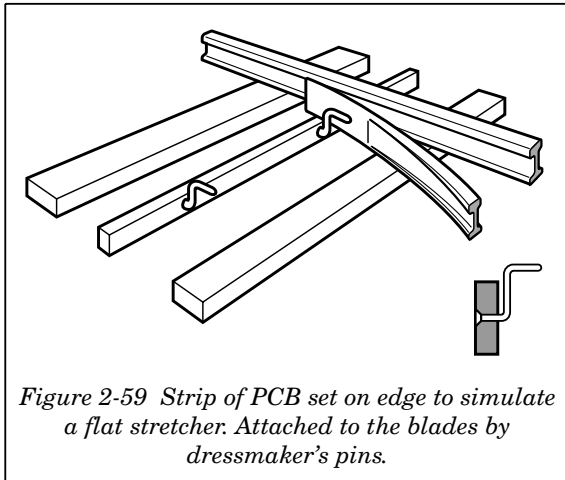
Strip of PCB set on edge to simulate a flat stretcher. Attached to the blades by dressmaker's pins.
